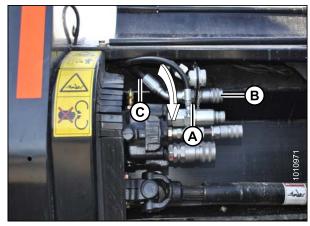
Auger and Reel Pressure Coupler and Hose – 14 Ft. and 16 Ft. Header Shown
